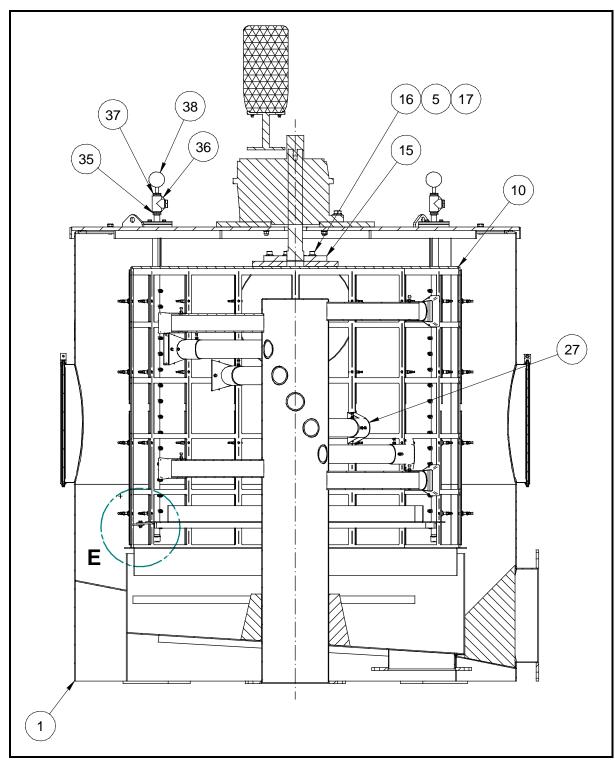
Final Assembly, Section A-A, WWF60-5L (Per Figure 4-6)
